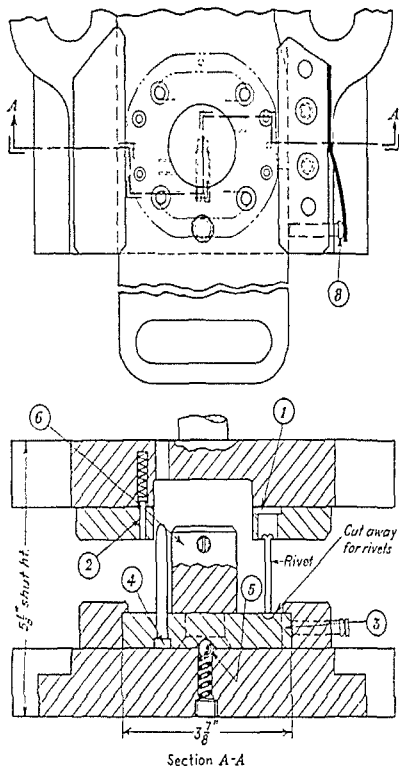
Multiple riveting die. (Harig Mfg. Corp.)
